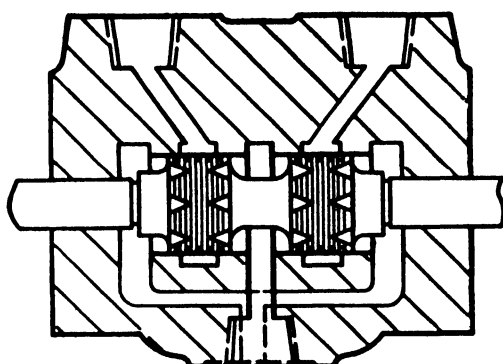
Open-center operating valve. (Hydro-Power Inc., Mount Gilead, Ohio.)
